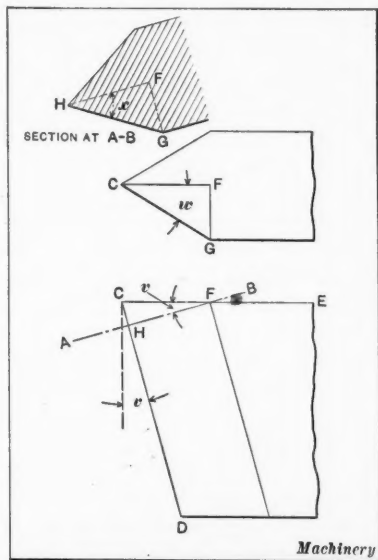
Diagram for calculating Angle of Thread-cutting Tool
